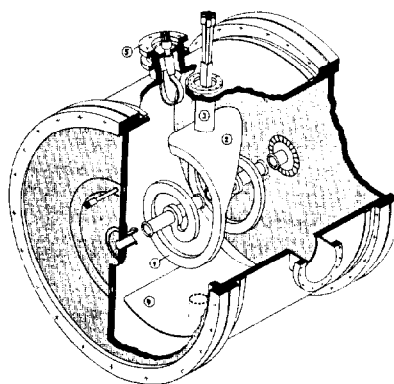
Cutaway drawing of the spiral-splitring resonator. Tank inner diameter is 50 cm. Numbers refer to the text.
